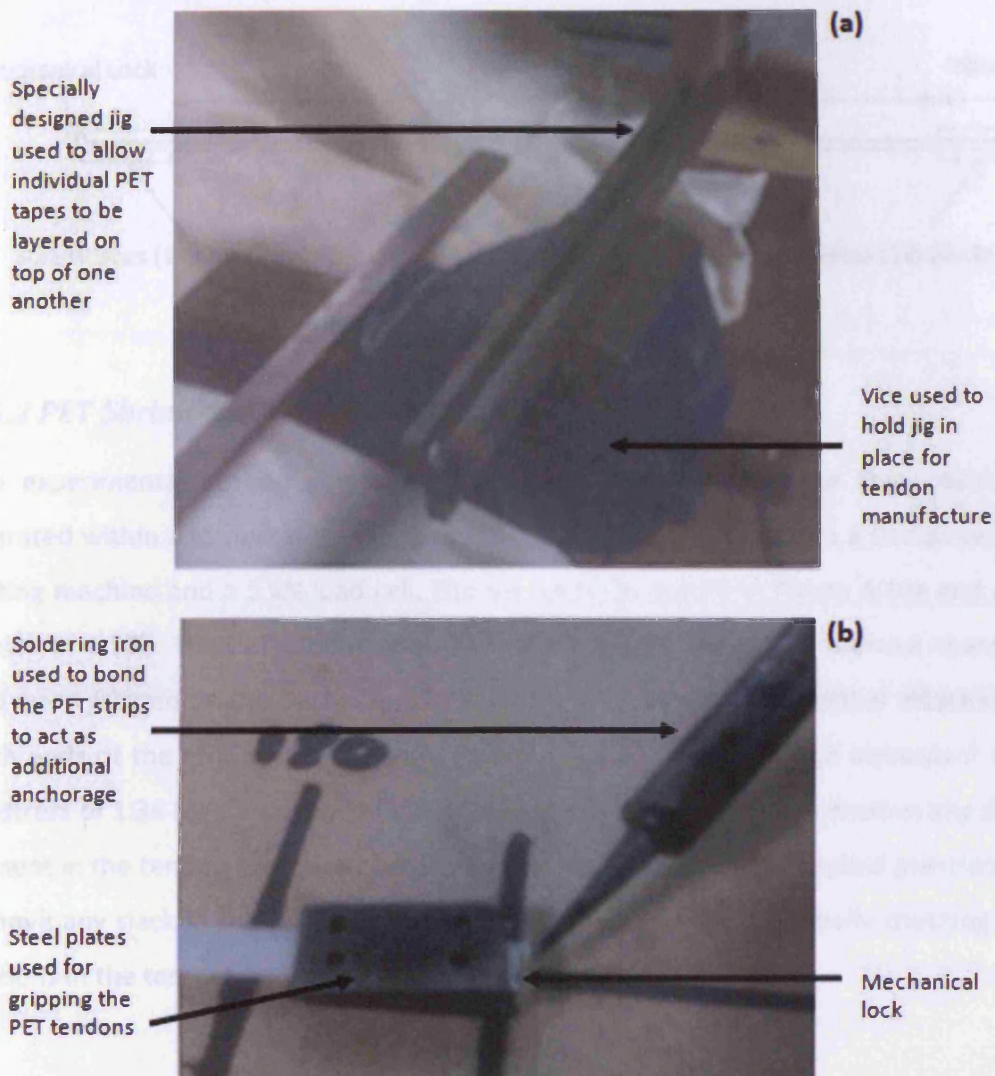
Specimen preparations: (a) Specially designed jig for specimen manufacture, and (b) Bonding of strips (Dunn et al., 2010)
